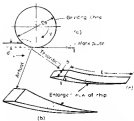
GRINDING GEOMETRY (a) SURFACE GRINDING OPERATION (b) ACTUAL SHAPE OF CHIP (c) THEORETICAL SHAPE OF CHIP
